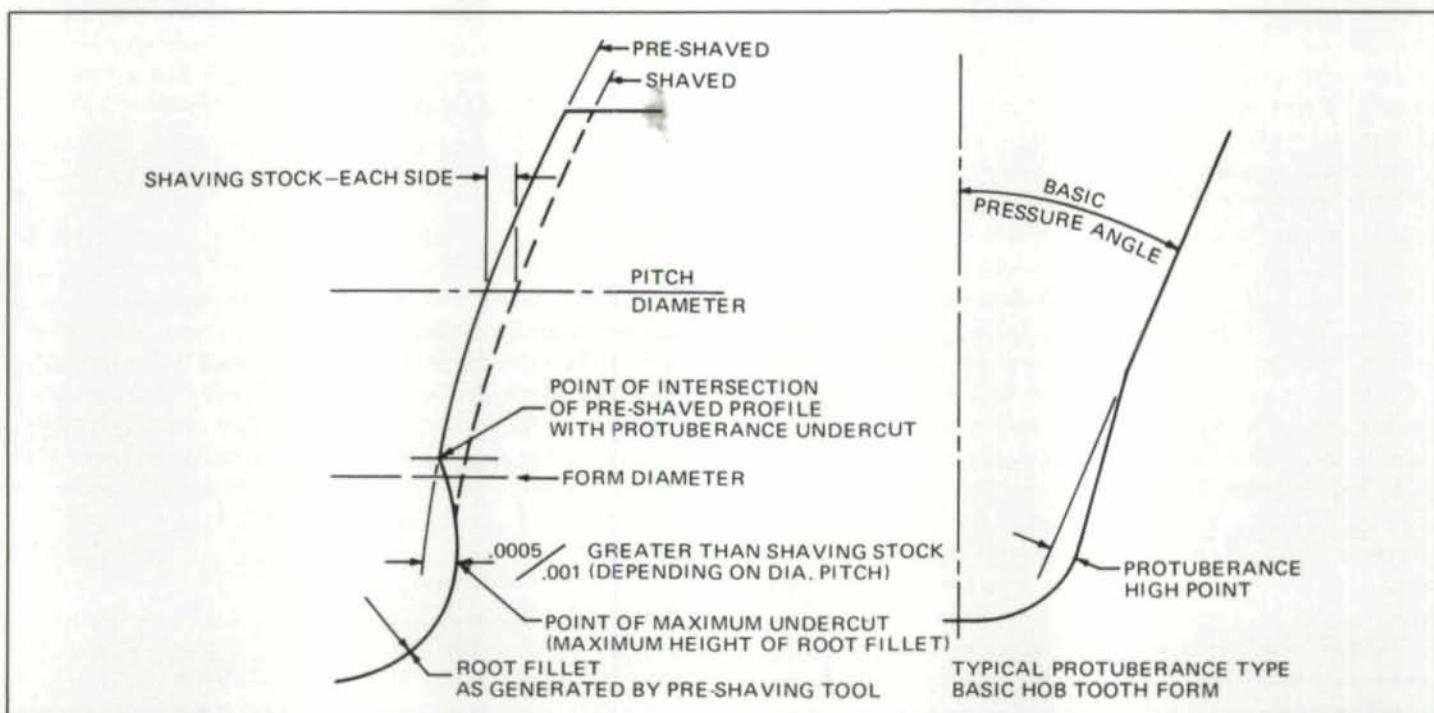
Undercut produced by a protuberance hob and the basic hob tooth form.
